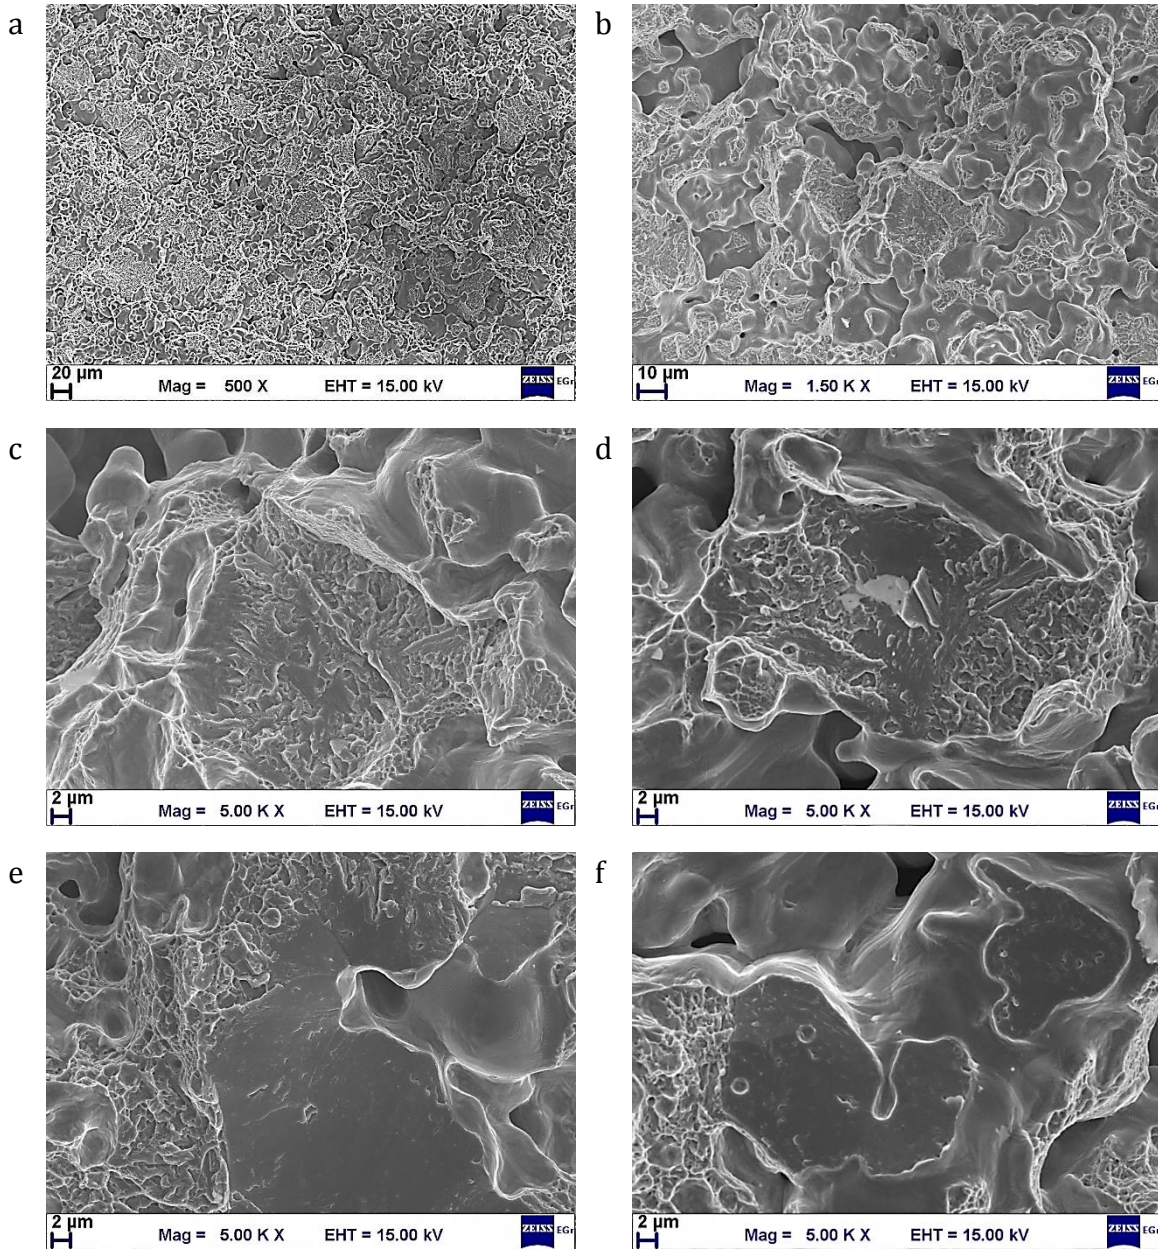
Fracture surface of DHP-UT sample showing (a) the general rough appearance at lower magnification, (b) agglomerates of the powder particles (c) & (d) transgranular cleavage and semi cleavage facets, (e) transparticle decohesion failure, (f) interparticle decohesion failure.
